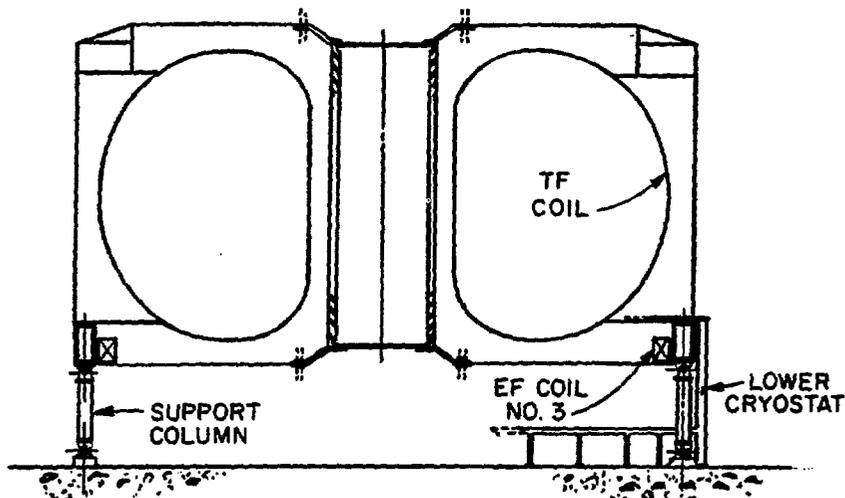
Initial assembly of the FED device - installation of TF coils, support columns, EF coil #3, lower cryostat.
